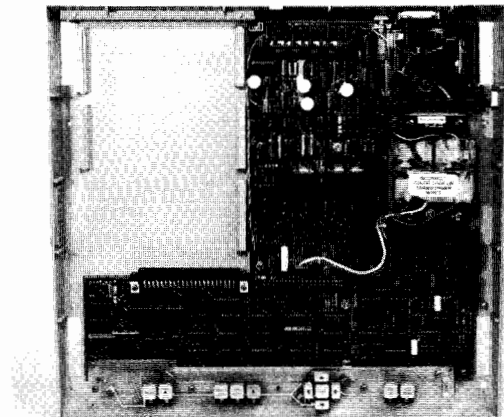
Top Cover and Deck Assemblies Identification/Removal
